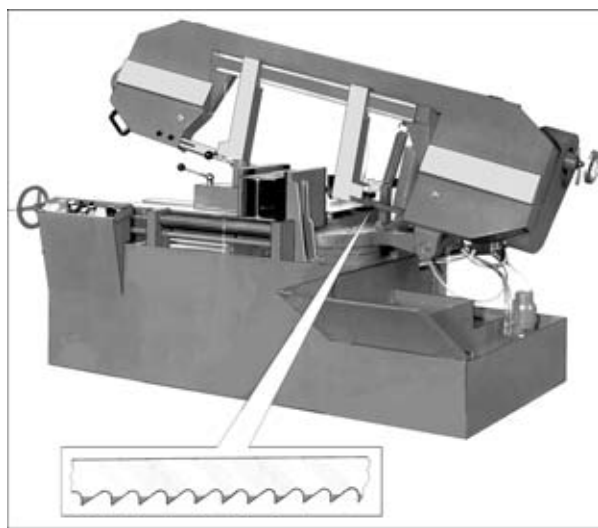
Horizontal band cut-off machine with bimetal circular saw, produced by EBW process
